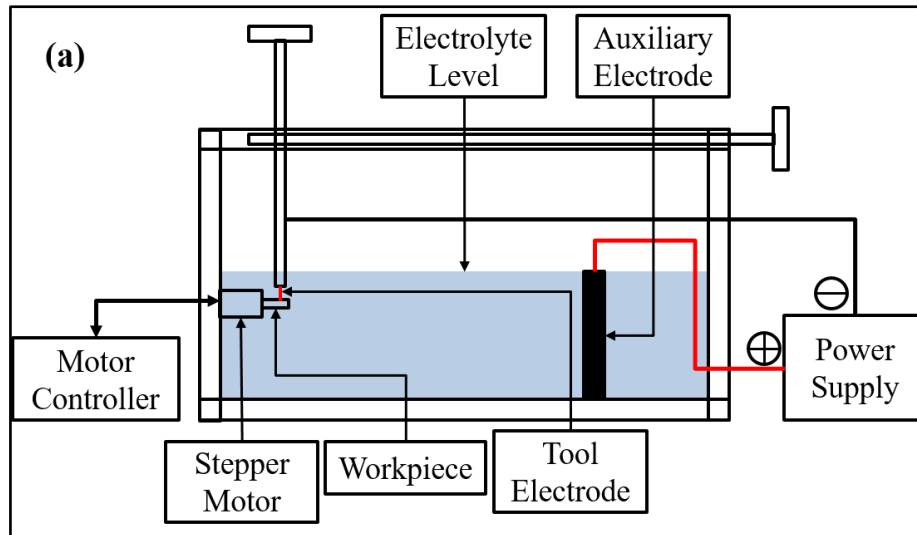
Schematic diagram of μ -ECDG setup used for cylindrical surface
